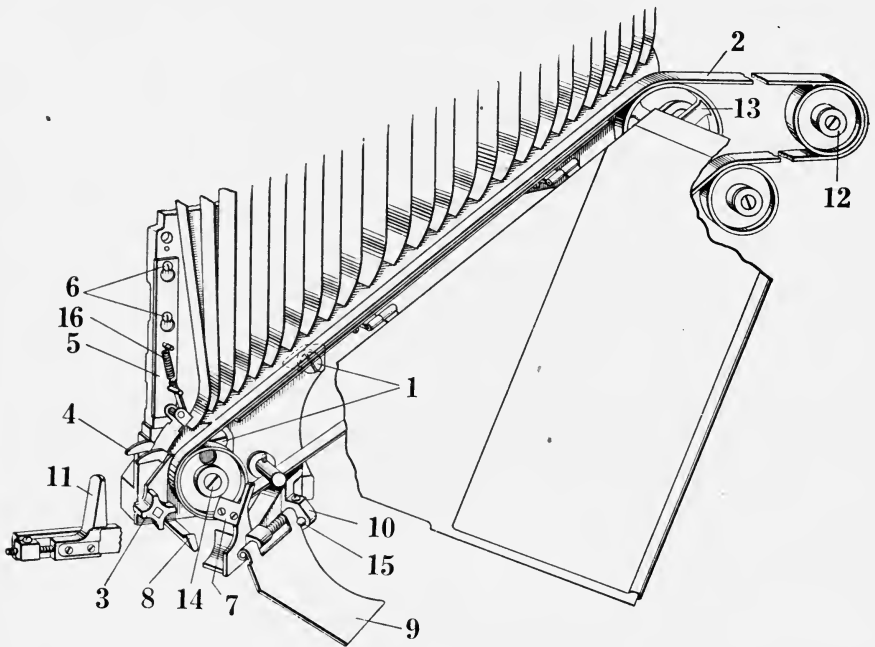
New Style Positive Assembler now applied to all Intertypes. Matrices do not depend upon gravity to reach the lower end of the chute spring 4, but are caused to pass from under it by the rapidly moving belt.
